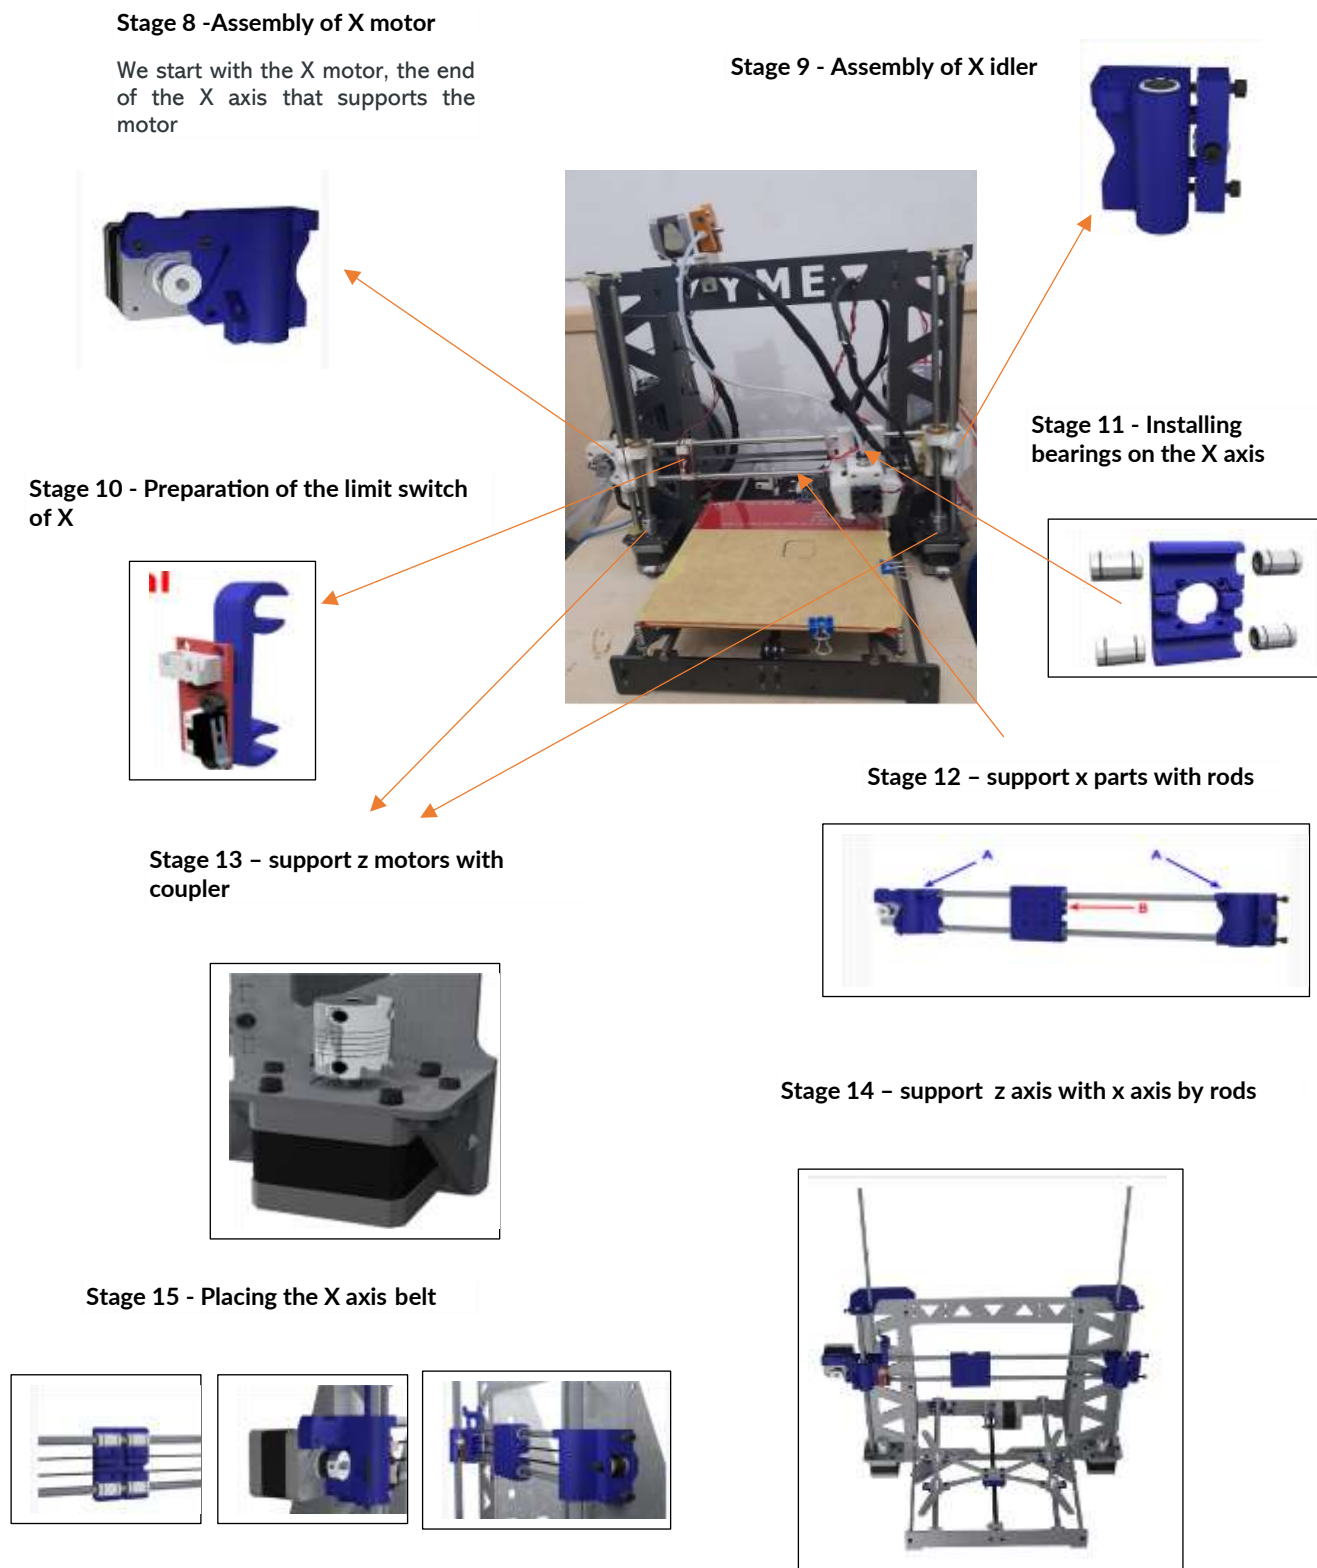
(b) Cont. Assembly stages of the designed 3D printer.
